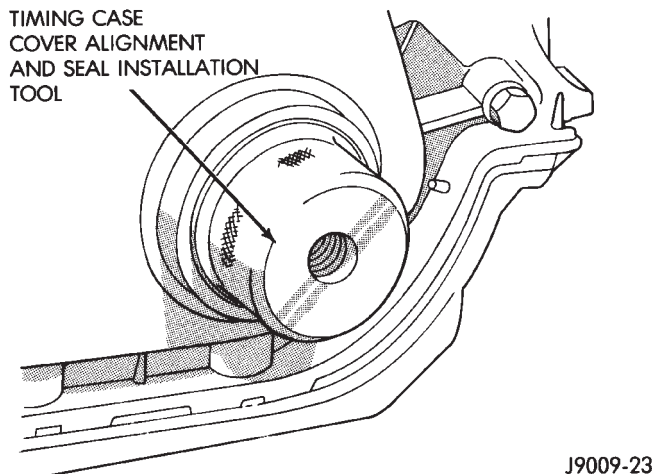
Timing Case Cover Alignment and Seal Installation Tool 6139
